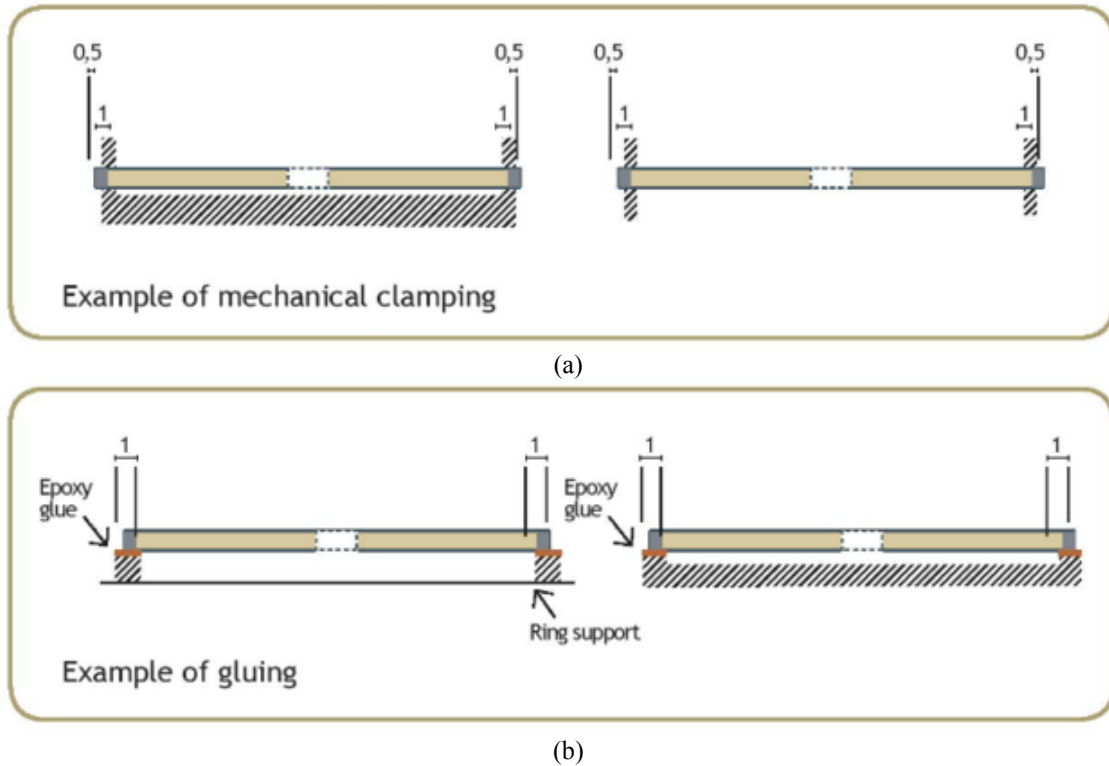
Noliac mounting suggestions for the ring bender (a) mechanical clamping, applying a force on the outer edge to keep the ring bender in place (b) epoxy adhesive, gluing the outer edge [29].
